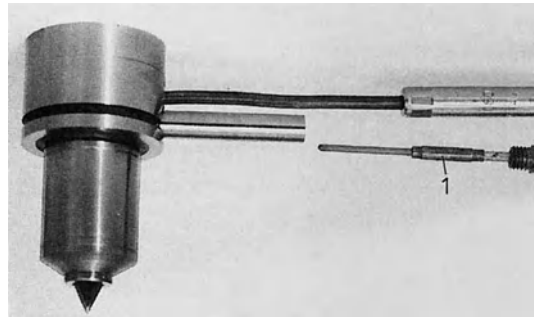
Hot-runner nozzle with replaceable thermocouple (1) (Courtesy: Heitec)
